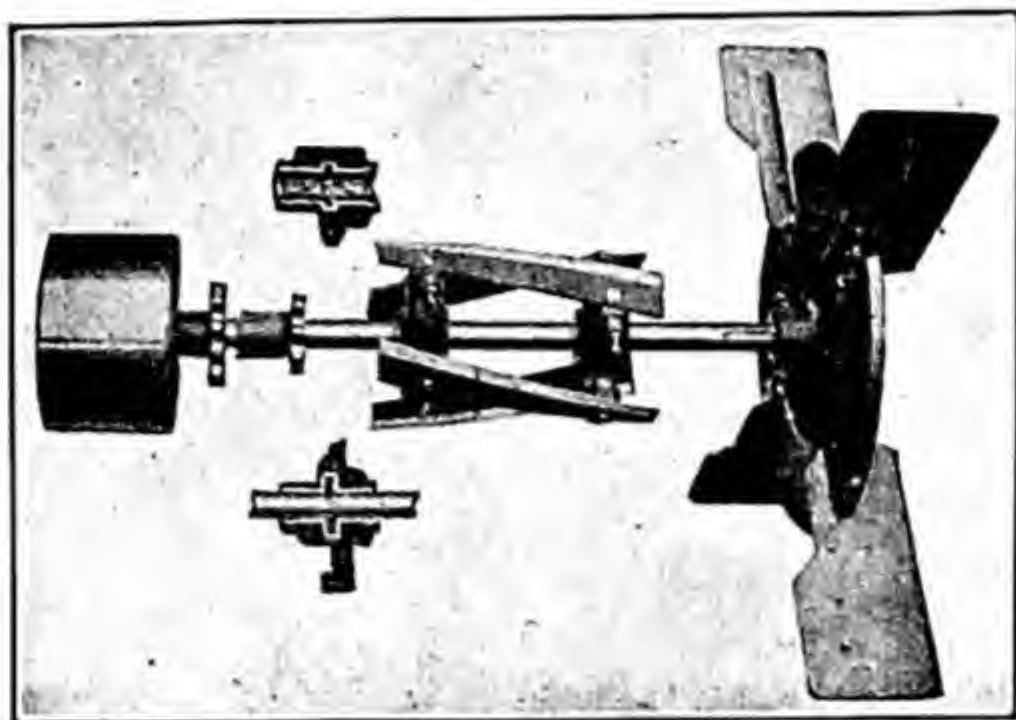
Cylinder cutting head, fan, and pulley mounted on the same shaft.
